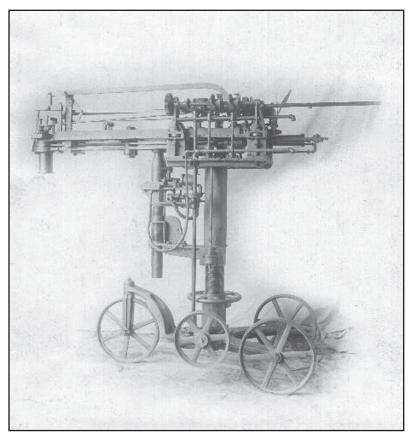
The second Owens bottle-blowing machine, which is the vacuum pump mounted on a three-wheel carriage—still a semiautomatic machine (Floyd, Bowers, and Brownlee 2006). (Photo courtesy of the Owens-Illinois, Inc. Archives, MSS-200 in the Ward M. Canaday Center for Special Collections, University of Toledo.)
